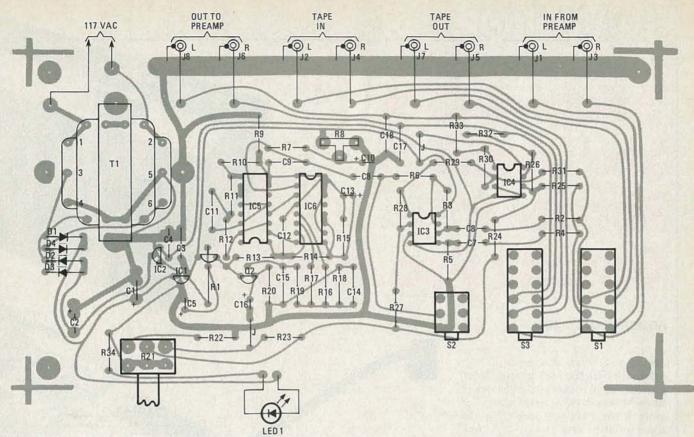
PROVISION IS MADE for mounting right-angle input and output jacks directly on board.
